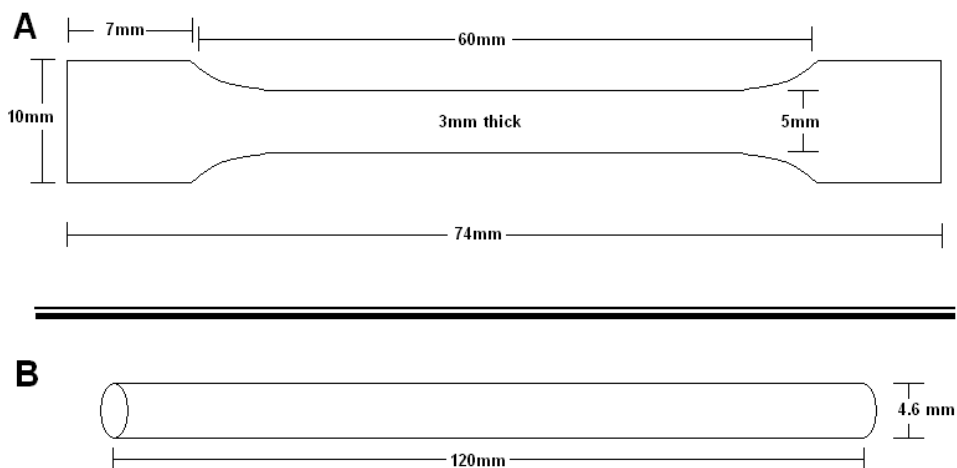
Two specimen types were developed for testing mechanical properties: A. An I-shaped melt-cast specimen produced from a custom-made mould. B. A cylindrical specimen cast in a 1 ml polypropylene syringe body.
